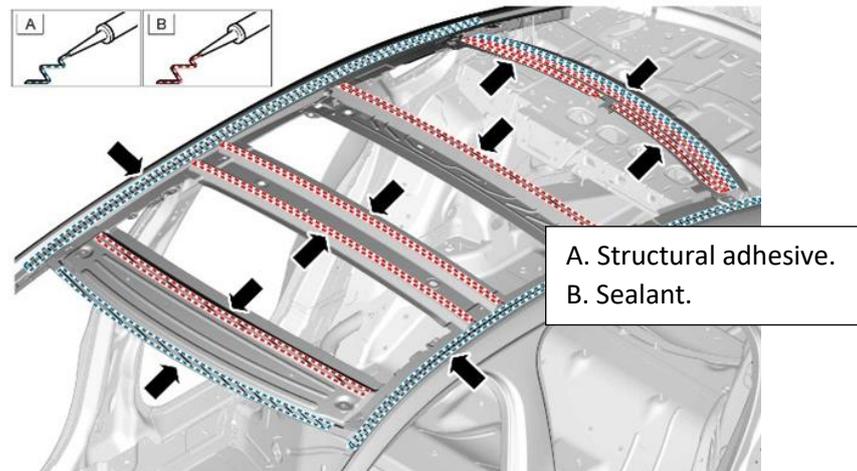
Zones of adhesive application in the roof join. Source: CESVIMAP
